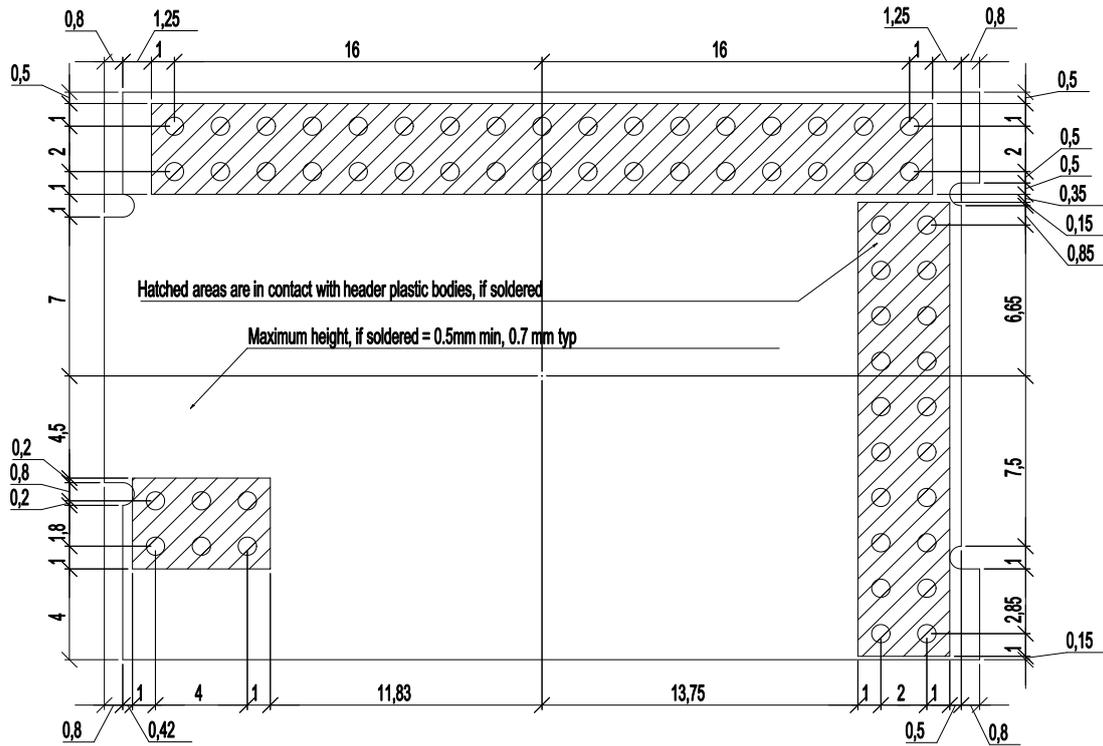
Micro MZ and LZ PCB Footprint – Pins facing downward view
